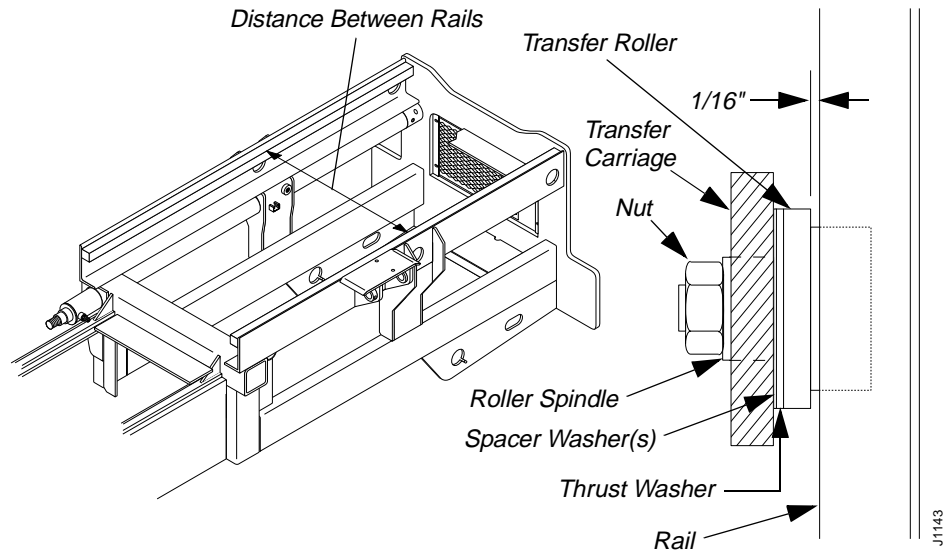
Spacer Washers for Rear Transfer Rollers
